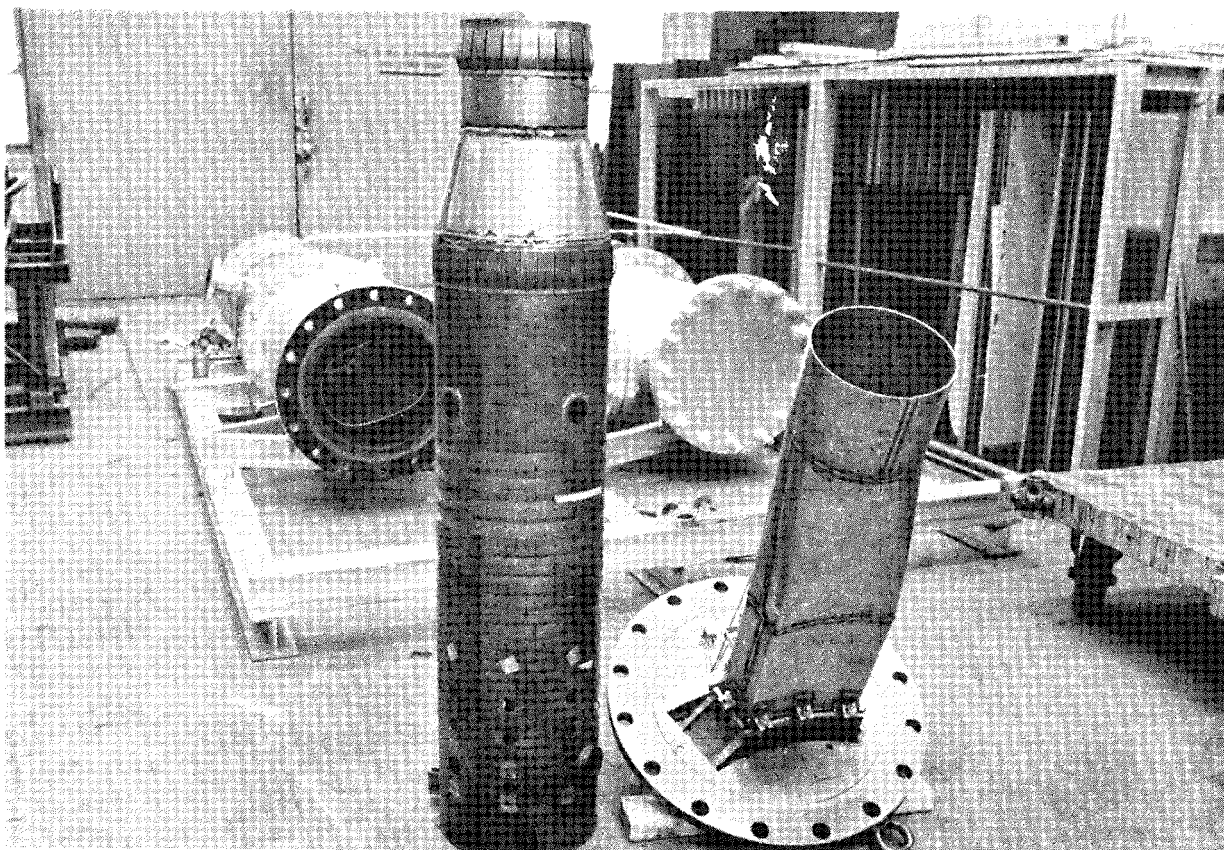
Main combustor liner and simulator assembly with transition piece before insertion into flow sleeve.
